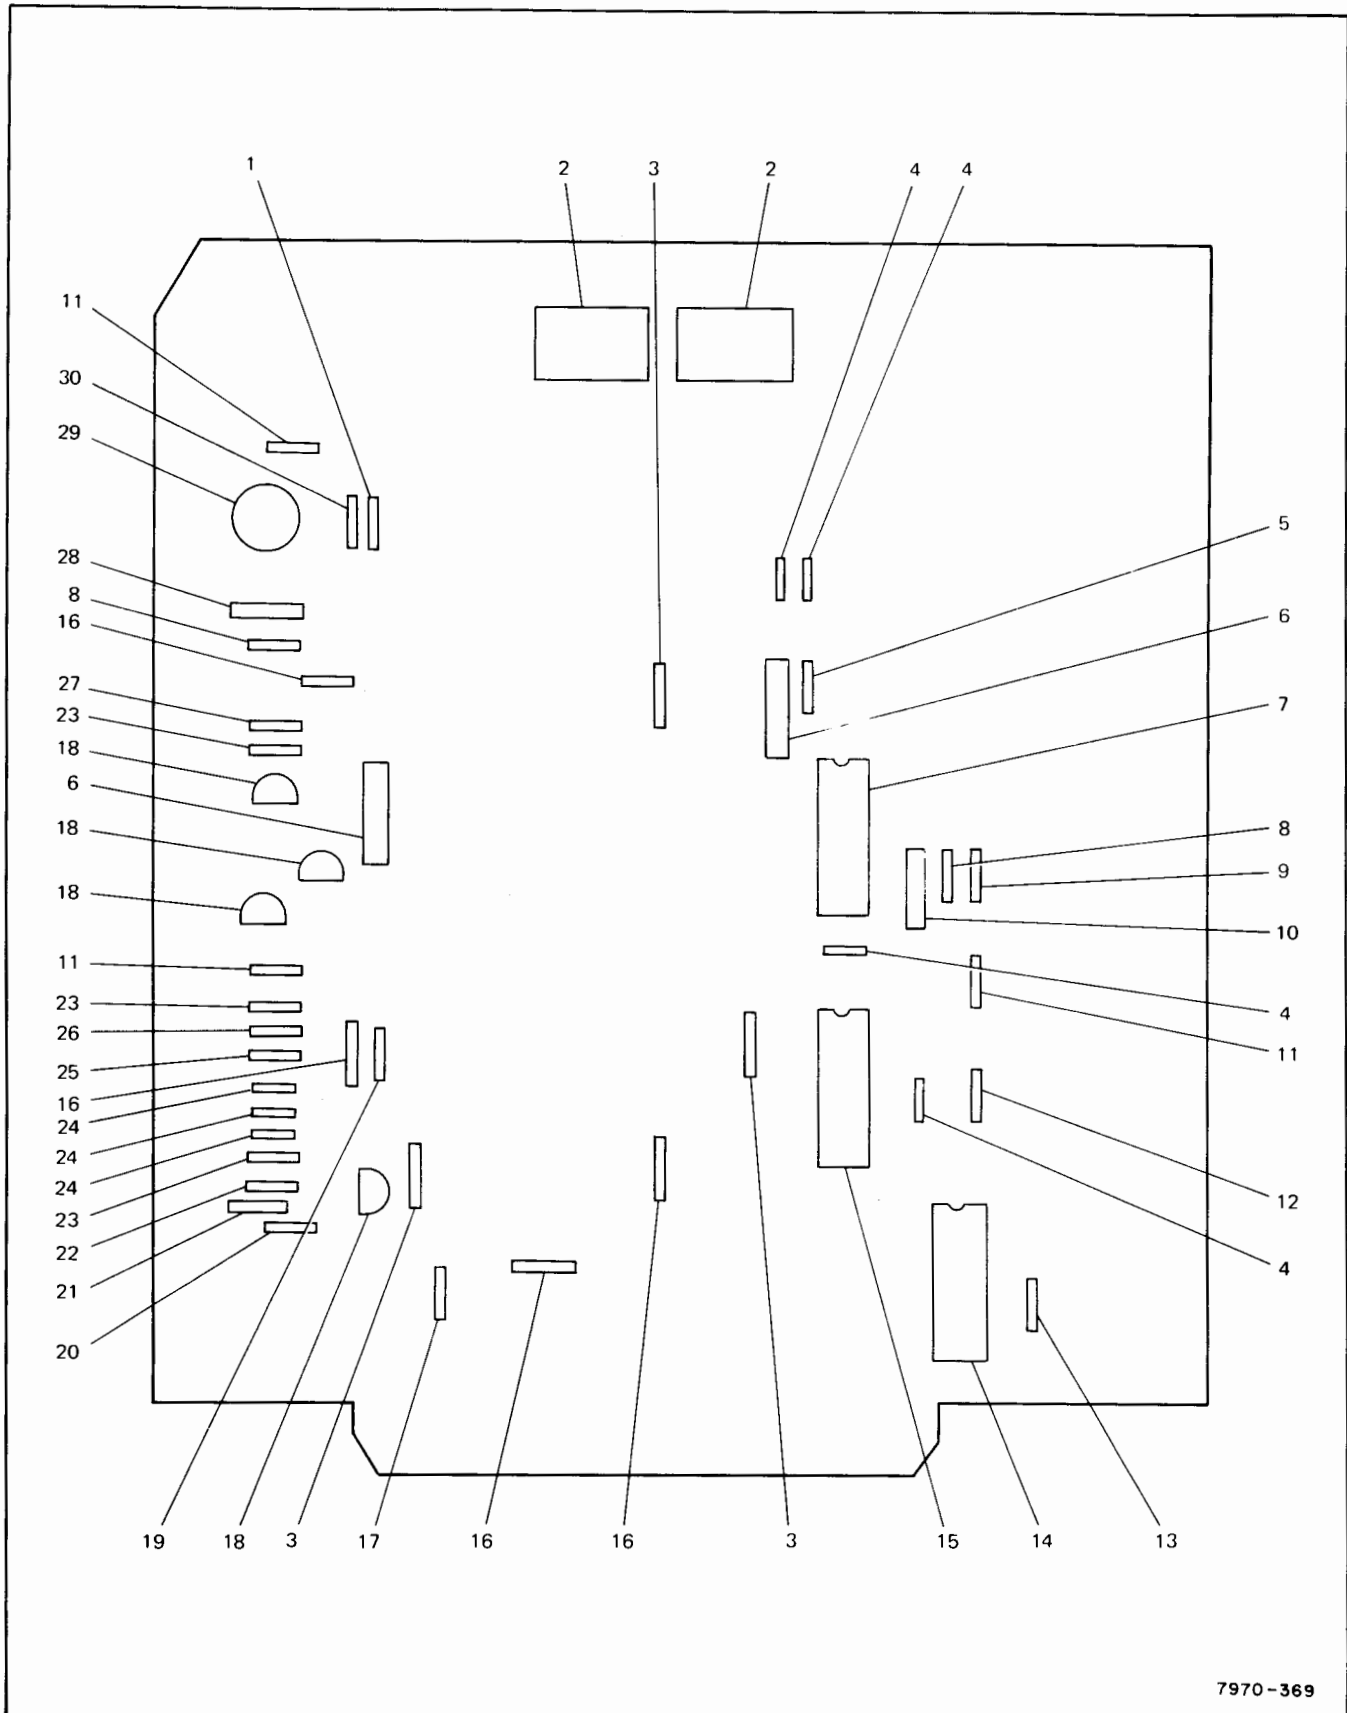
Read/Read Control PC Assembly A18A1 (Sheet 2 of 2)
